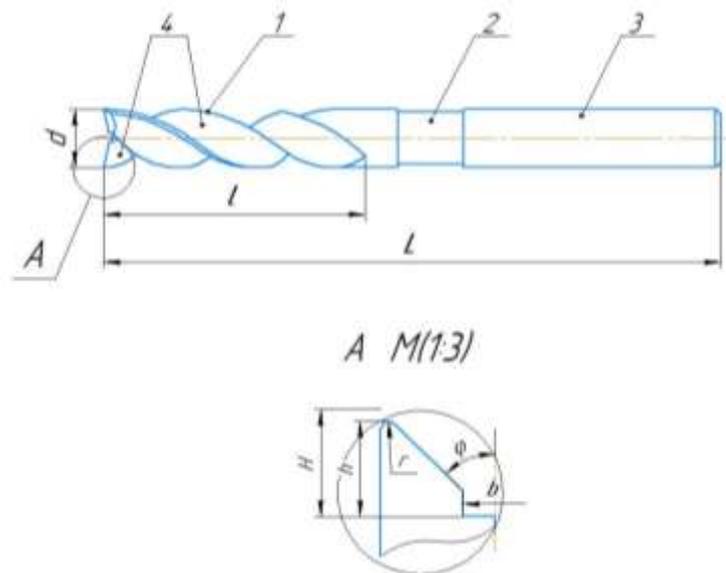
Drill for processing holes in sheet materials: 1-working part, 2-neck, 3-shank, 4-chip cutting grooves, 5-two grooves.
